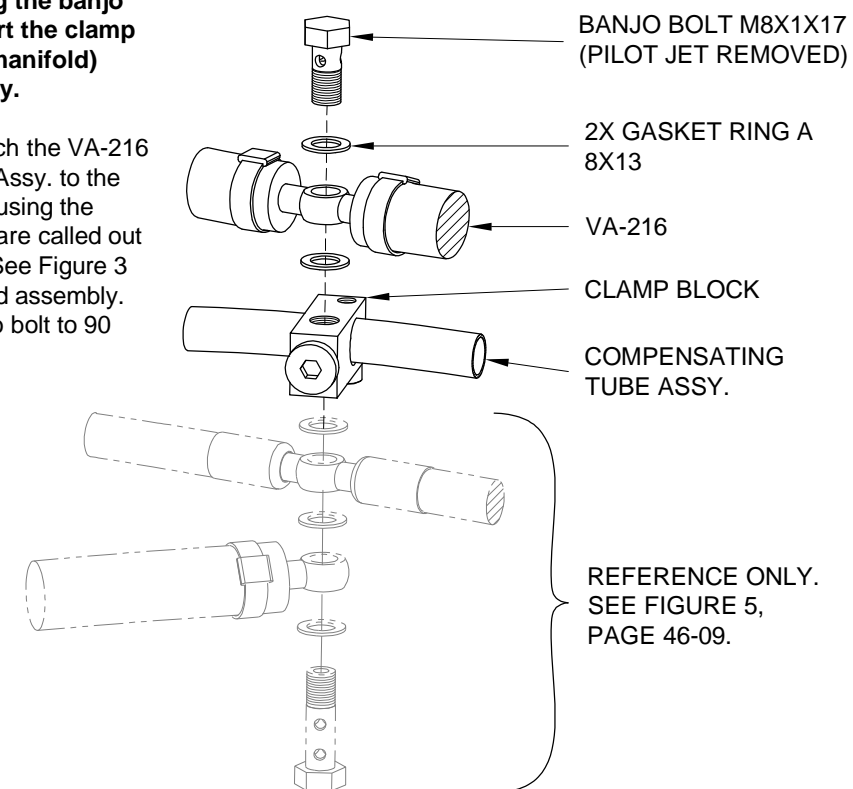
ATTACHING FUEL RETURN ASSY.
